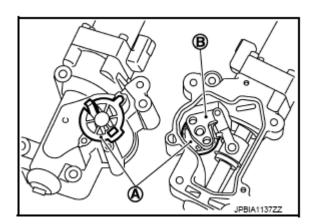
Supporting VVEL Actuator Arm Using Holding Jig
